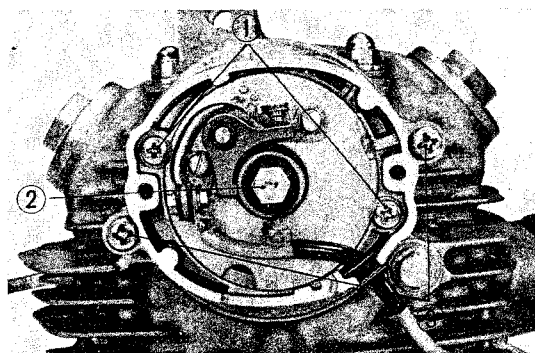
① 5mm screws ② 6mm bolt ③ 6mm screws
